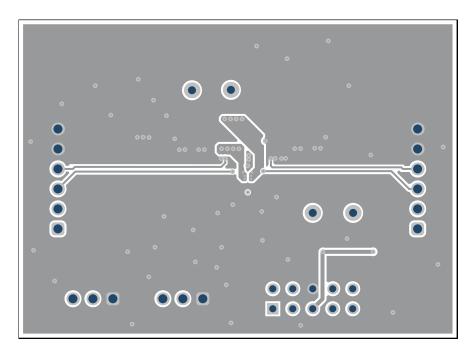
TPS6381xEVM PCB - Bottom Layer (Top View)
